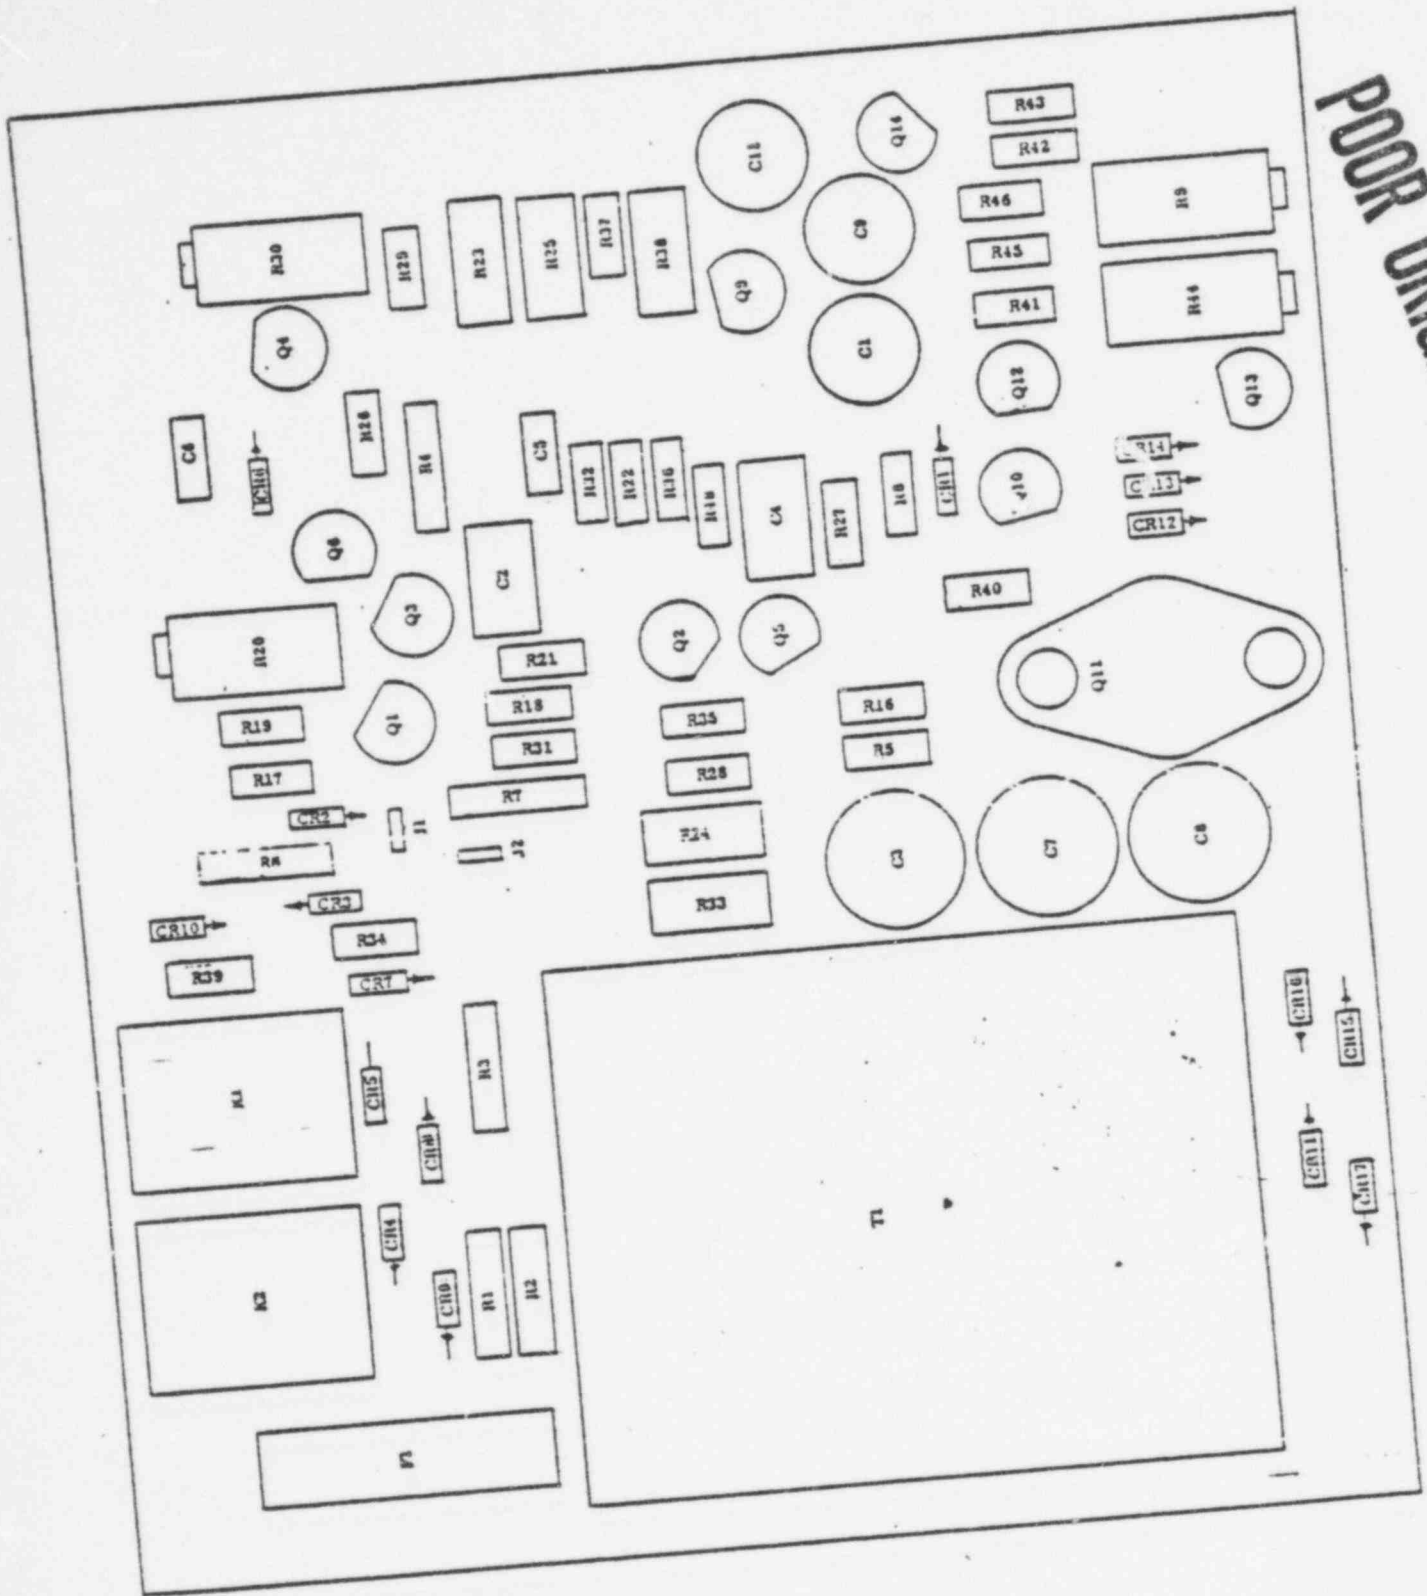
Model 846-1 Readout Module Circuit Board Assembly
